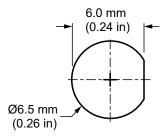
Recommended Mounting Hole Dimensions for the CSB-RGFB-102-UFFR Cable Assembly
